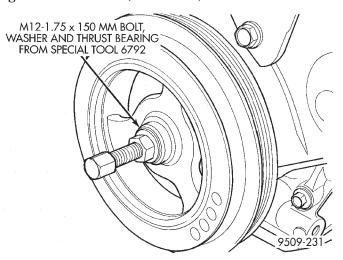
Crankshaft Damper—Installation CRANKSHAFT OIL SEAL—REAR
